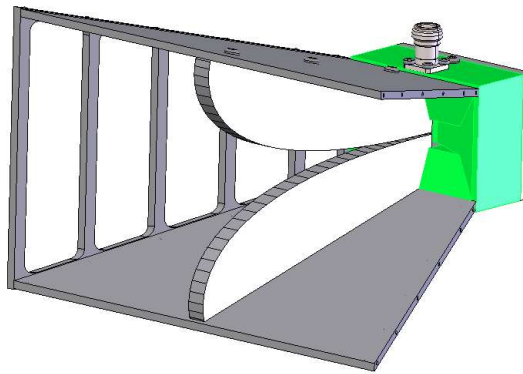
Cross-section of the DRGH showing the coaxial feed assembly.
